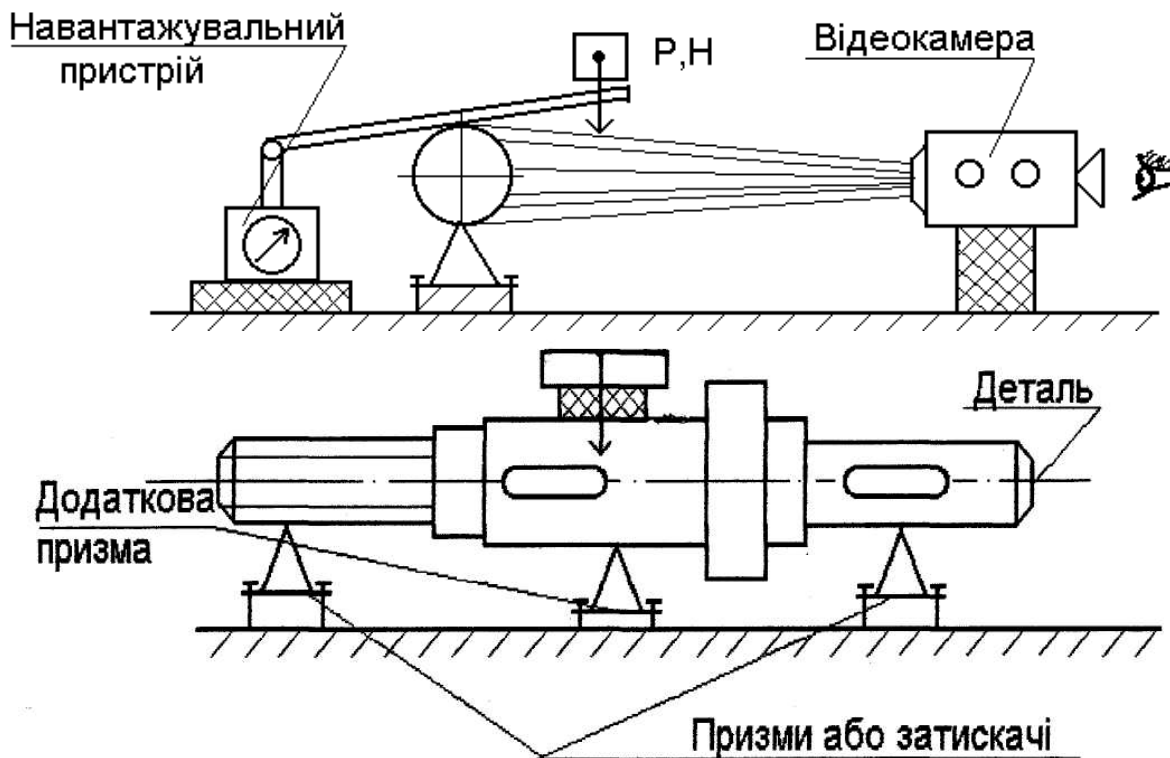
Scheme devices for loading parts mechanically (compression and bending).
